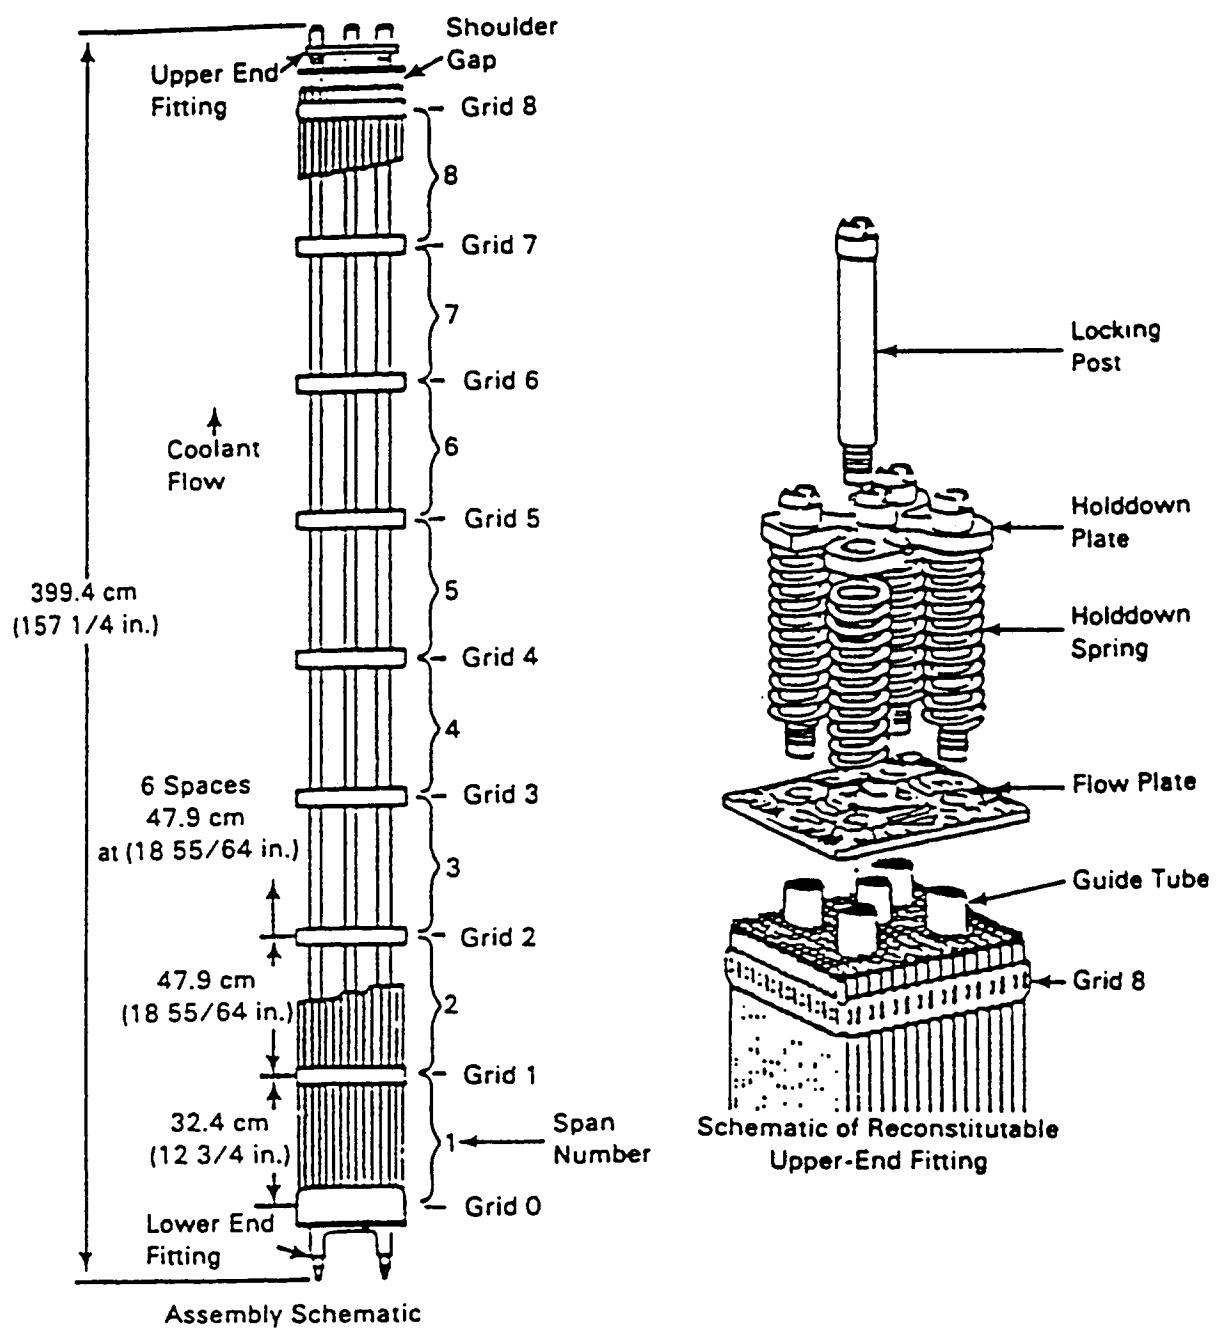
Combustion Engineering 14 x 14 Fuel Assembly Schematic
